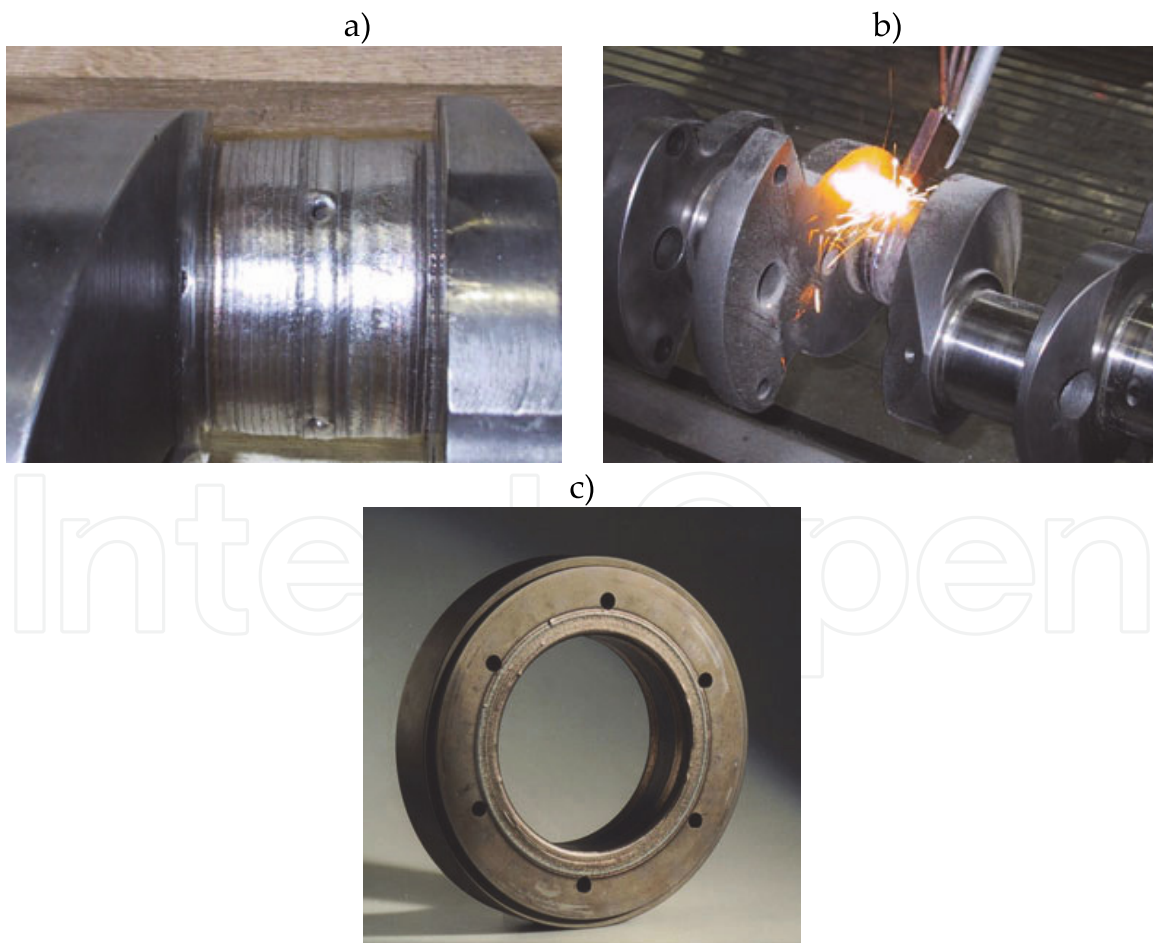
The application of DLD technology for the crankshafts (a, b) and parts for the automotive industry (c) [5]
